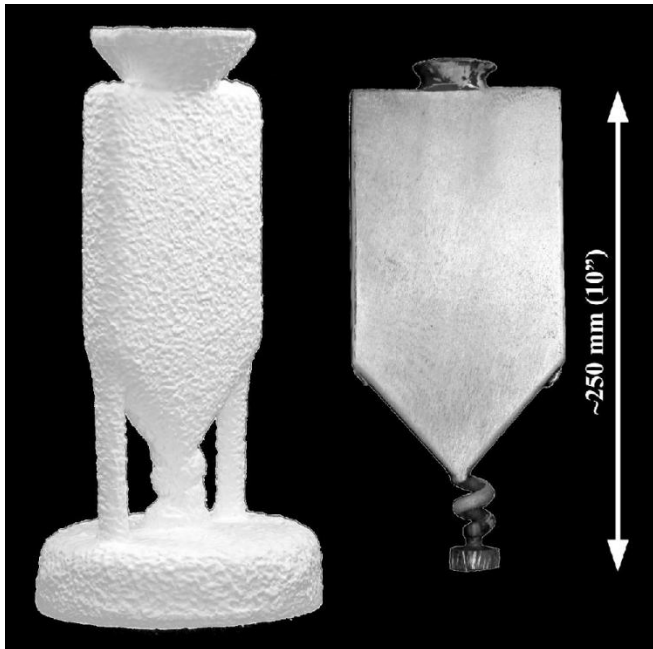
Ceramic investment casting mold with single-crystal starter at the bottom of the plate and single-crystal plate following directional solidification and removal of ceramic mold (courtesy of A. J. Elliott).
